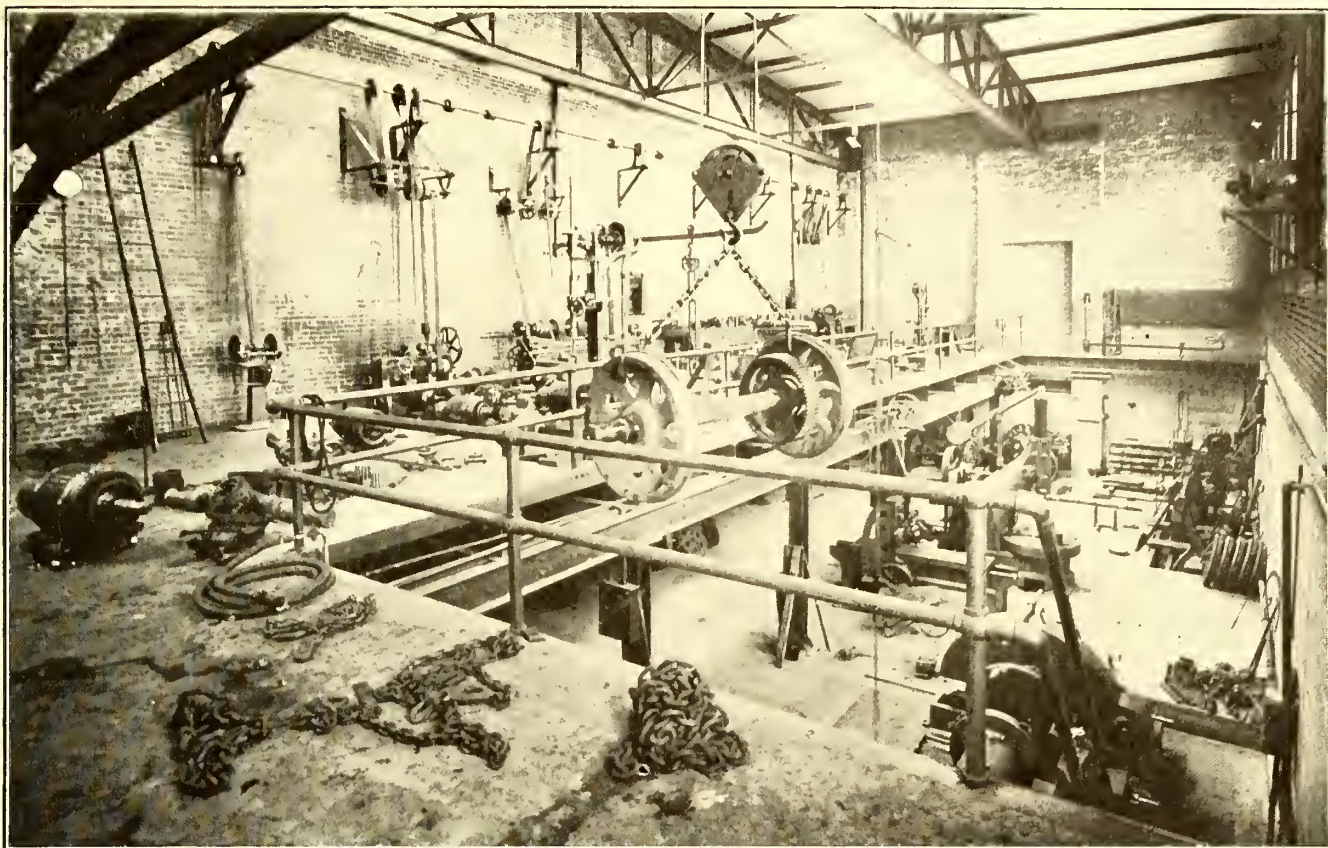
Syracuse Shops—General View of Machine Shop and of Jib Crane Delivering a Wheel Set to Heavy Tool Department
